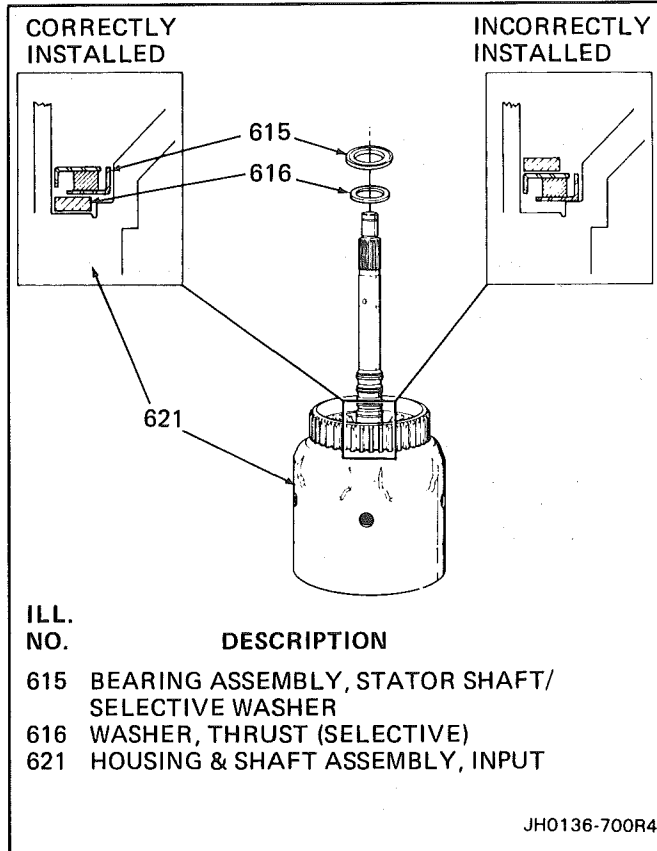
Selective Washer and Thrust Bearing Properly Installed
